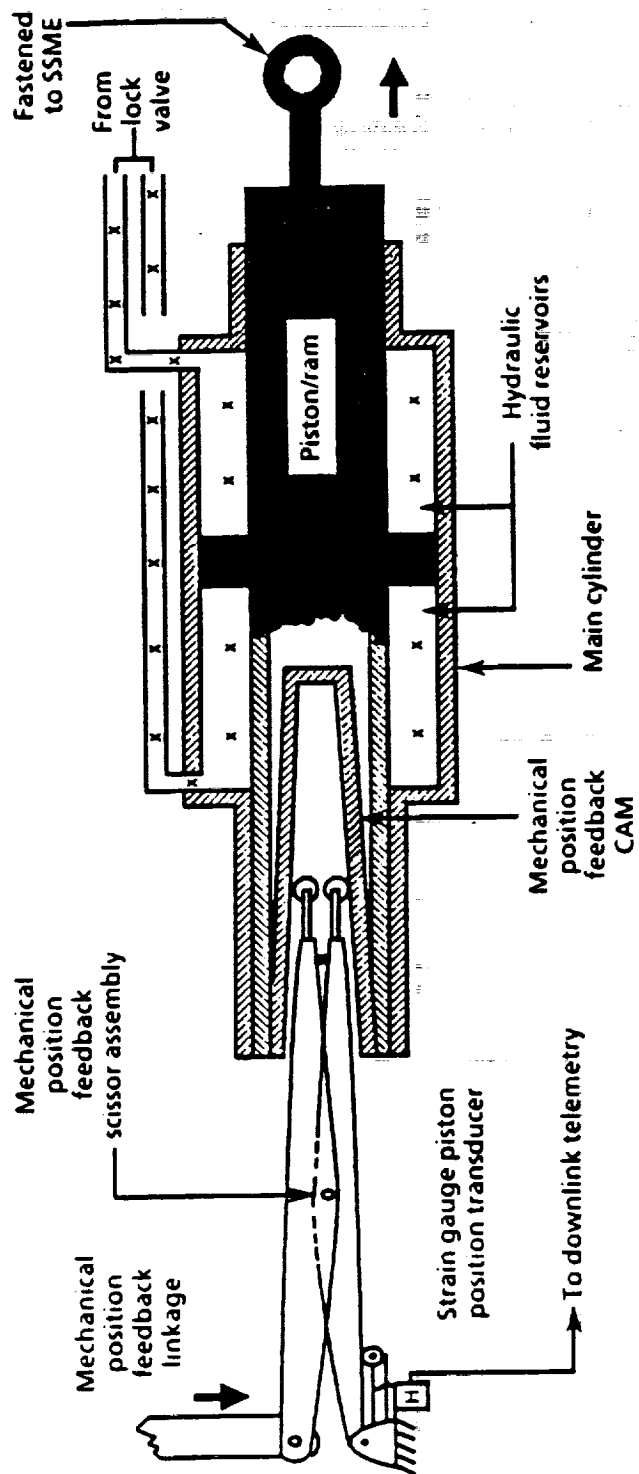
CYLINDER AND PISTON/RAM ASSEMBLY
